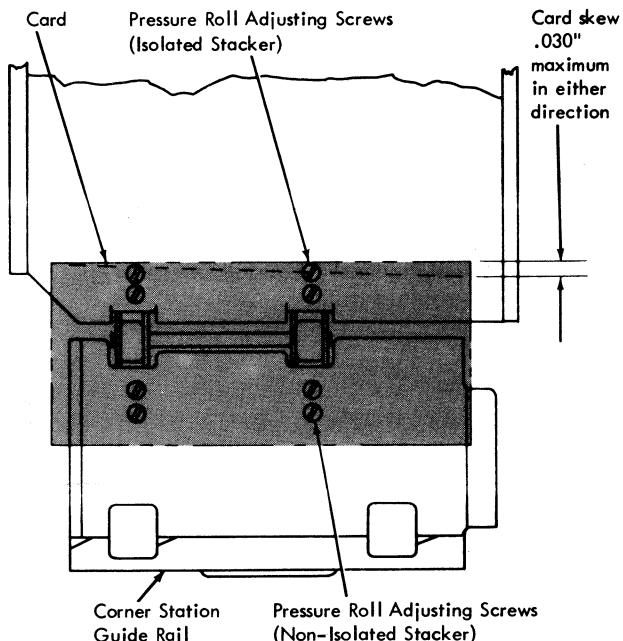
A. Pressure Roll Adjusting Screw Locations
